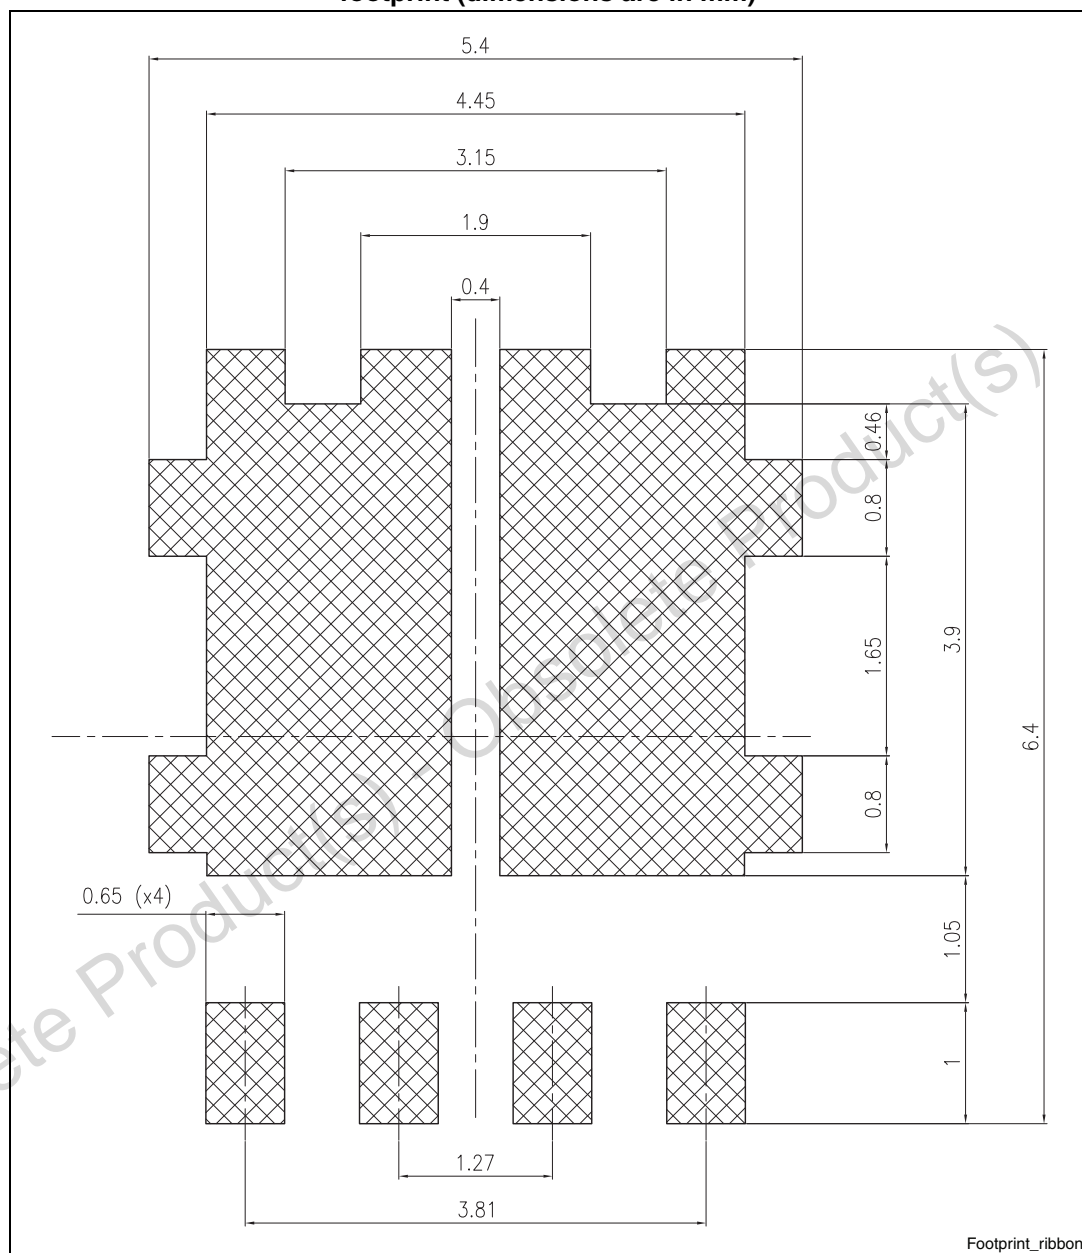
PowerFLAT™ 5x6 - 8 leads dual pad (ribbon) drawing recommended footprint (dimensions are in mm)
